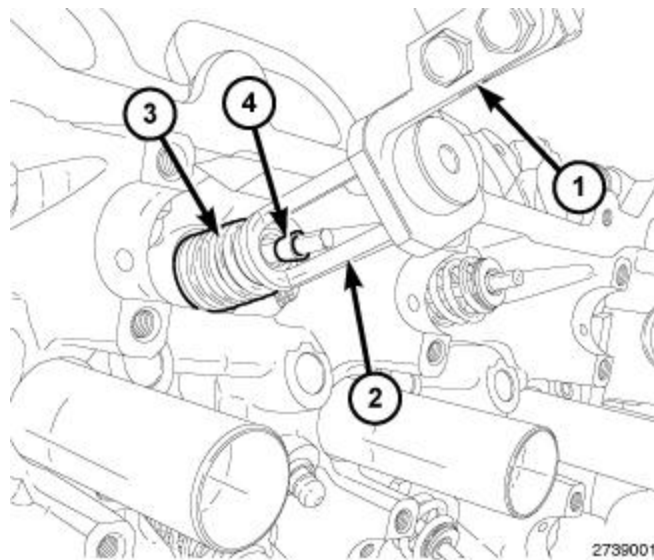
Compressing Valve Spring & Locating Valve Retaining Locks
